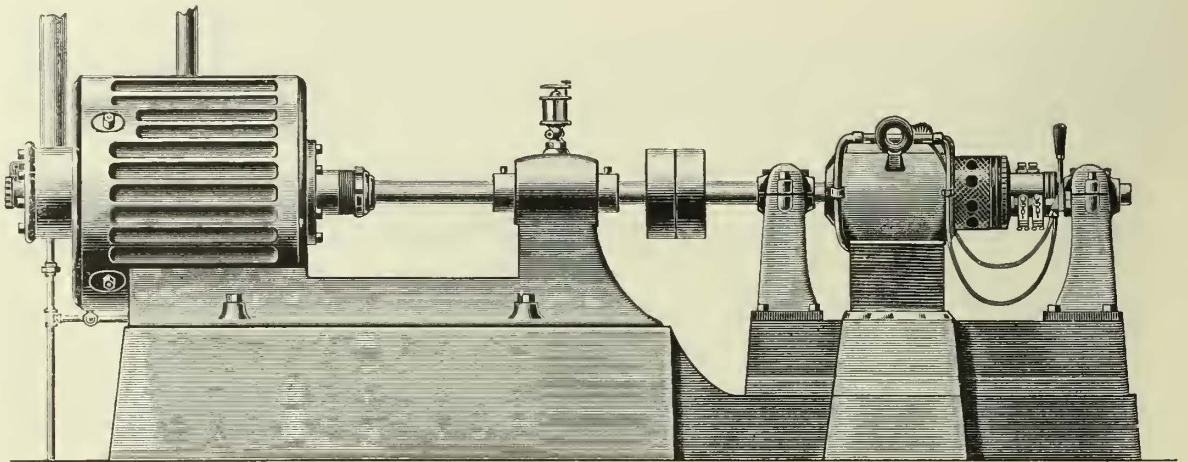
AMERICAN HIGH SPEED ENGINE, DRIVING A THOMSON-HOUSTON GENERATOR.
